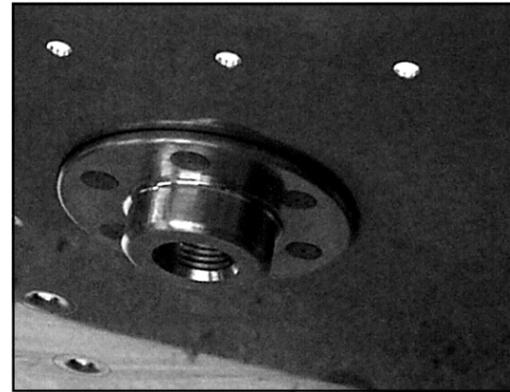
The VA-112 drain flange riveted to the outside of the tank skin.
